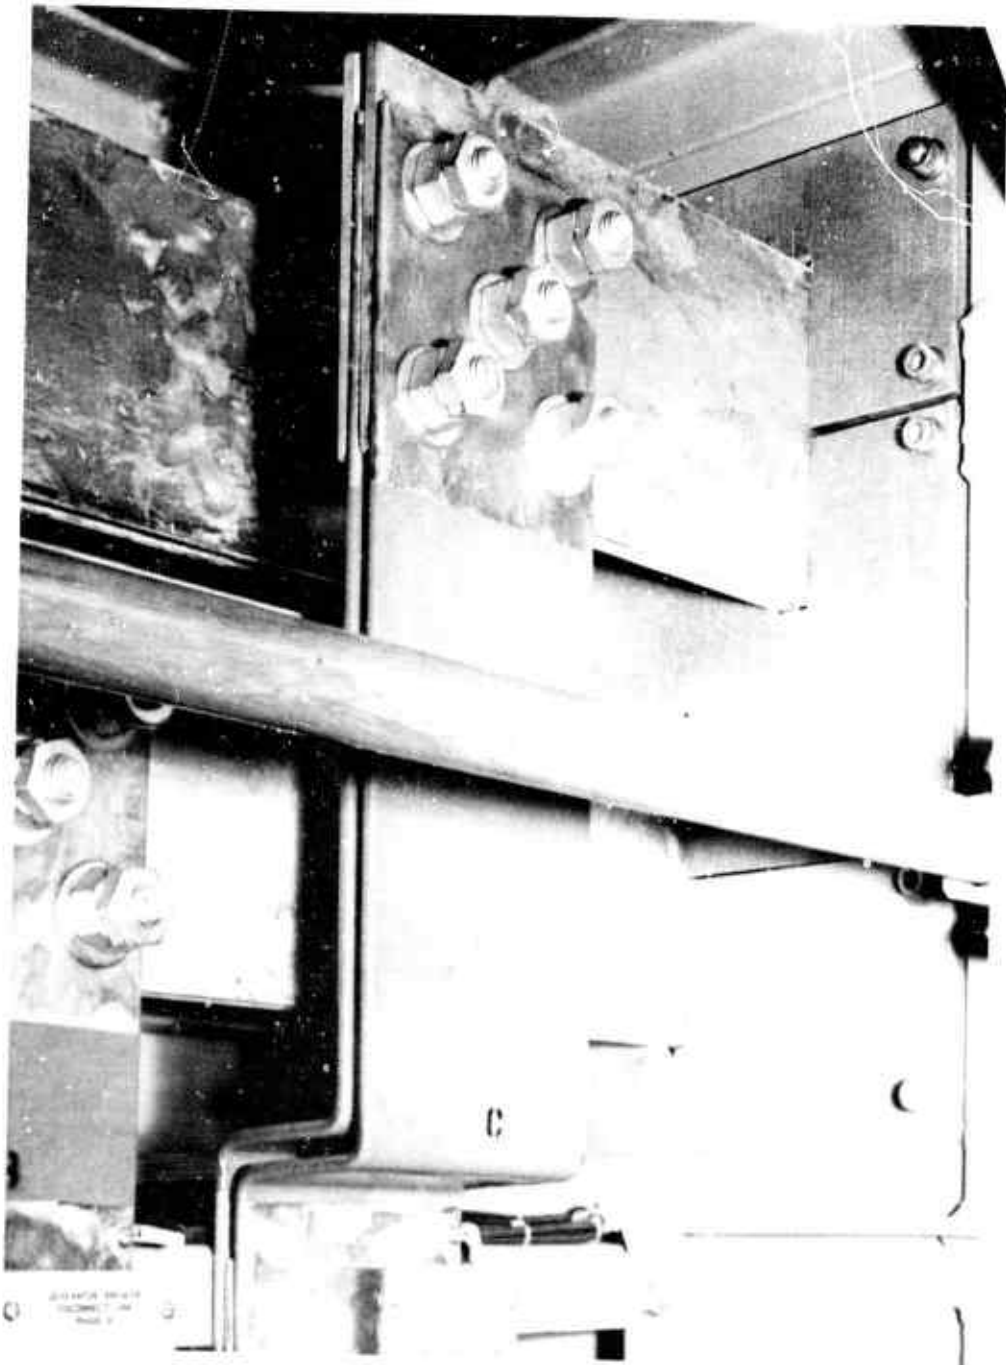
Damage from Shock Test - 2400 A Breaker Bay (Rea-).
